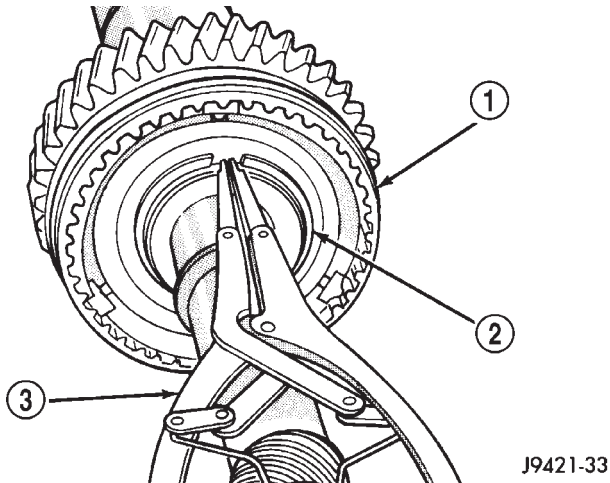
FIFTH GEAR NEEDLE BEARING
